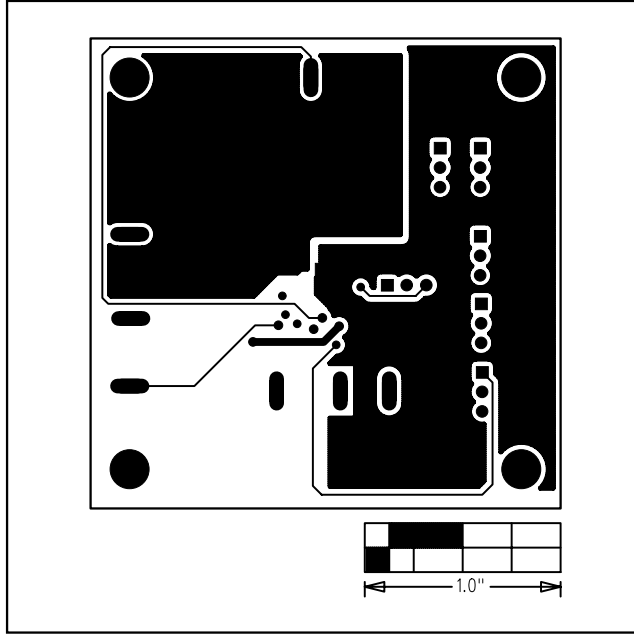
MAX1515 EV Kit PC Board Layout—Solder Side
